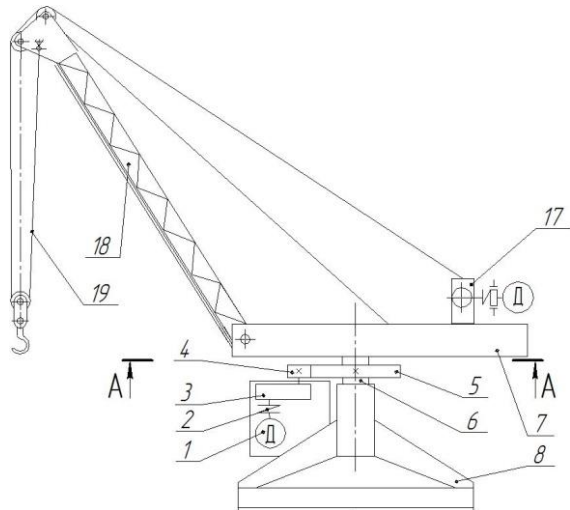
Jib crane: 1 – engine; 2 – elastic coupling; 3 – reducer; 4 – gear; 5 – slewing ring; 6 – rotary shaft; 7 – rotary part; 8 – frame.
